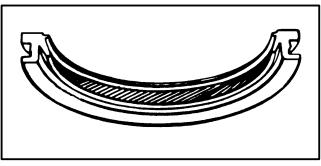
OIL SEAL HALF, REAR MAIN BEARING
